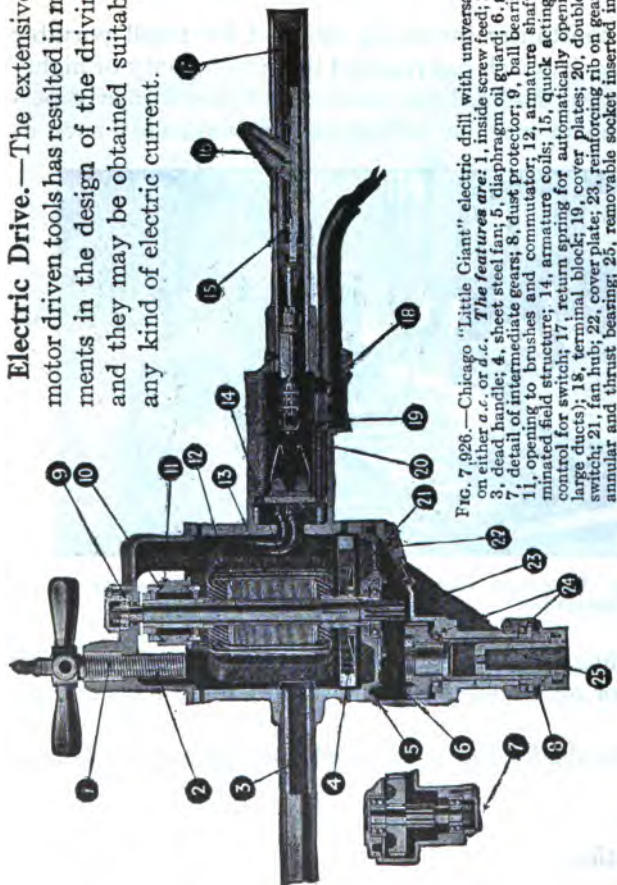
,926.—Chicago "Little Giant" electric drill with universal motor which runs on either *a.c.* or *d.c.* The features are: 1, inside screw feed; 2, protecting sheath; 3, dead handle; 4, sheet steel fan; 5, diaphragm oil guard; 6, grease compartment; 7, detail of intermediate gears; 8, dust protector; 9, ball bearing; 10, commutator; 11, opening to brushes and commutator; 12, armature shaft and pinion; 13, laminated field structure; 14, armature coils; 15, quick acting switch; 16, trigger control for switch; 17, return spring for automatically opening switch (used on large ducts); 18, terminal block; 19, cover plates; 20, double pole double break switch; 21, fan hub; 22, cover plate; 23, reinforcing rib on gear case; 24, combined annular and thrust bearing; 25, removable socket inserted in spindle.
